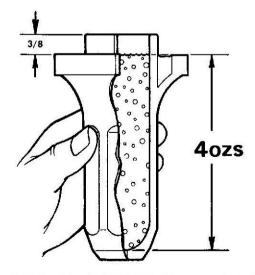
Using Tool J-26852 to Measure Lubricant.
